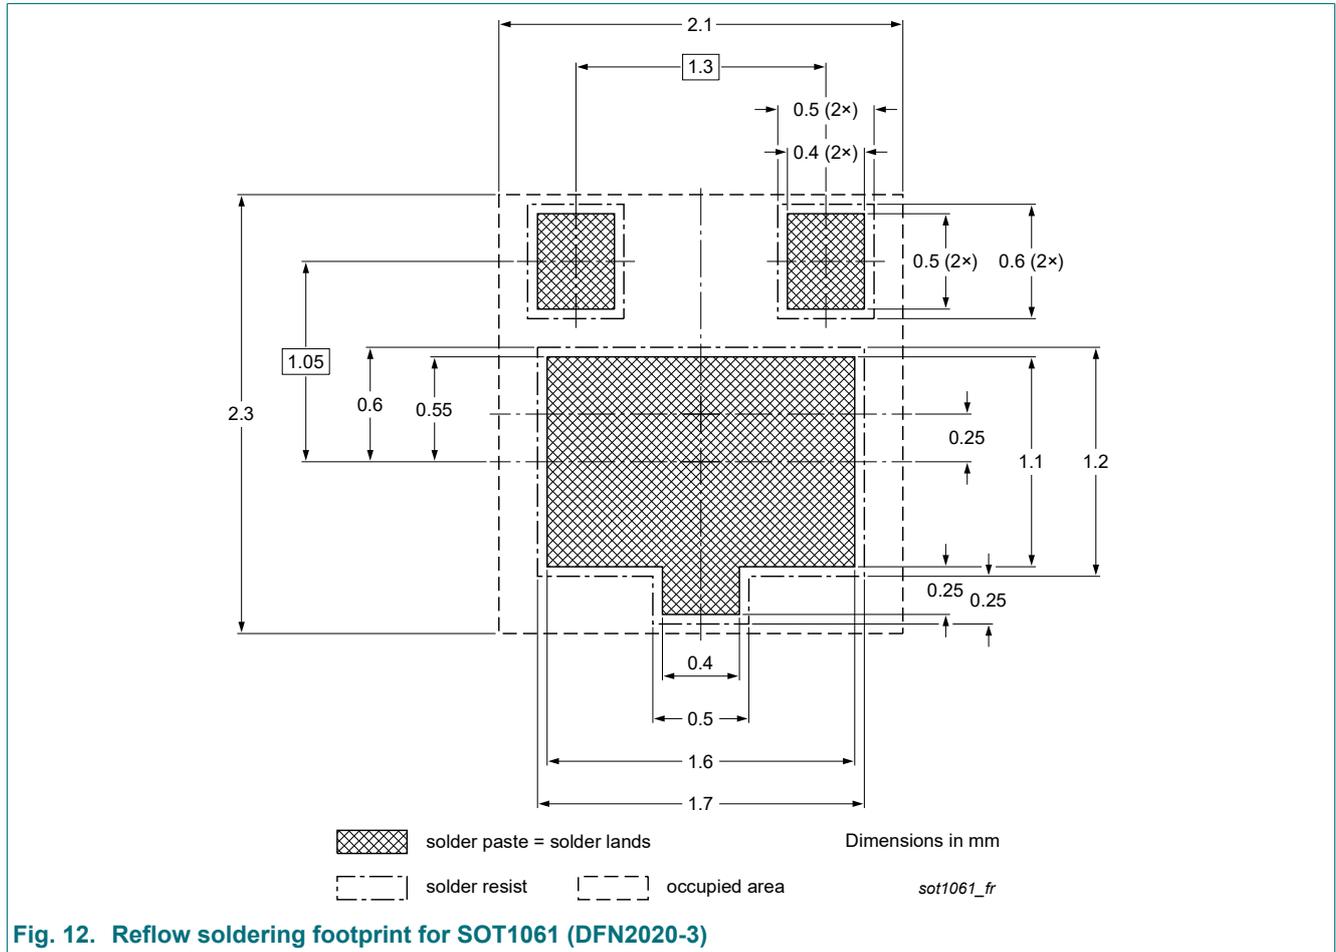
Reflow soldering footprint for SOT1061 (DFN2020-3)
